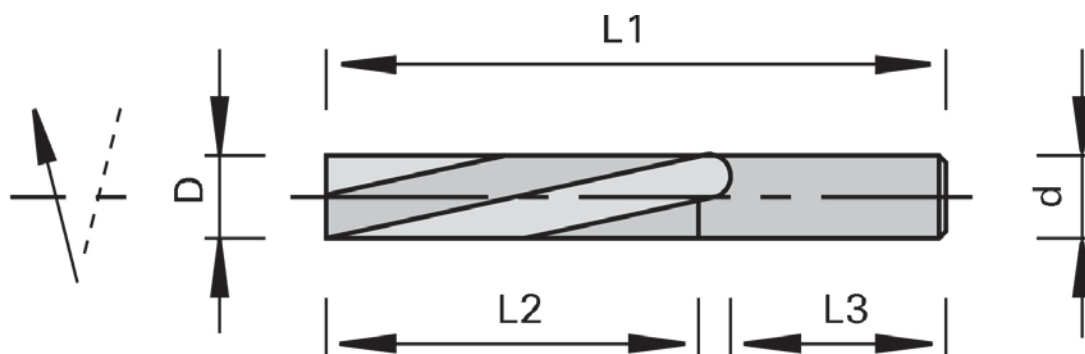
A Finishing cutter LEUCO VFW 178354. (<https://www.leuco.com/EN/US/web/home>).
